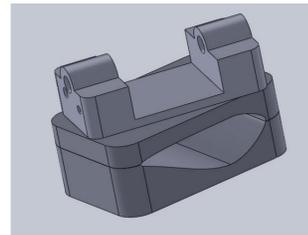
The new aluminium clamp design (left) incorporates the change in angle (16°). It consists of the old aluminium bracket which was modified bolted on to the top of a newly manufactured aluminium clamp.
